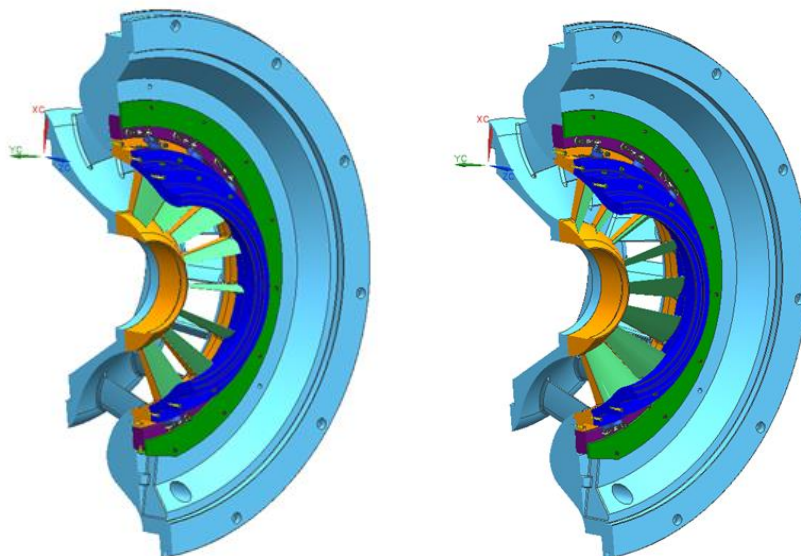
Inlet Guide Vane Assembly (Isometric Cut-Away View)
